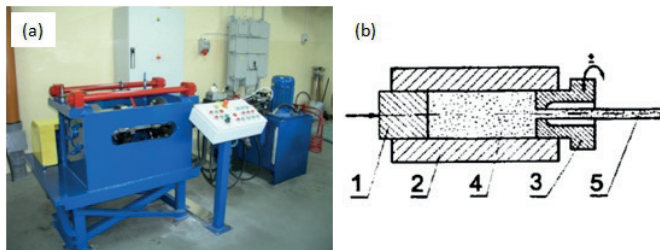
The KOBOL hydraulic extrusion press for extruding metals and alloys: (a) KOBOL hydraulic press (b) diagram of the hydraulic press: 1 – punch, 2 – container, 3 – a die rotating on both sides, 4 – starting material, 5 – final product [14]
